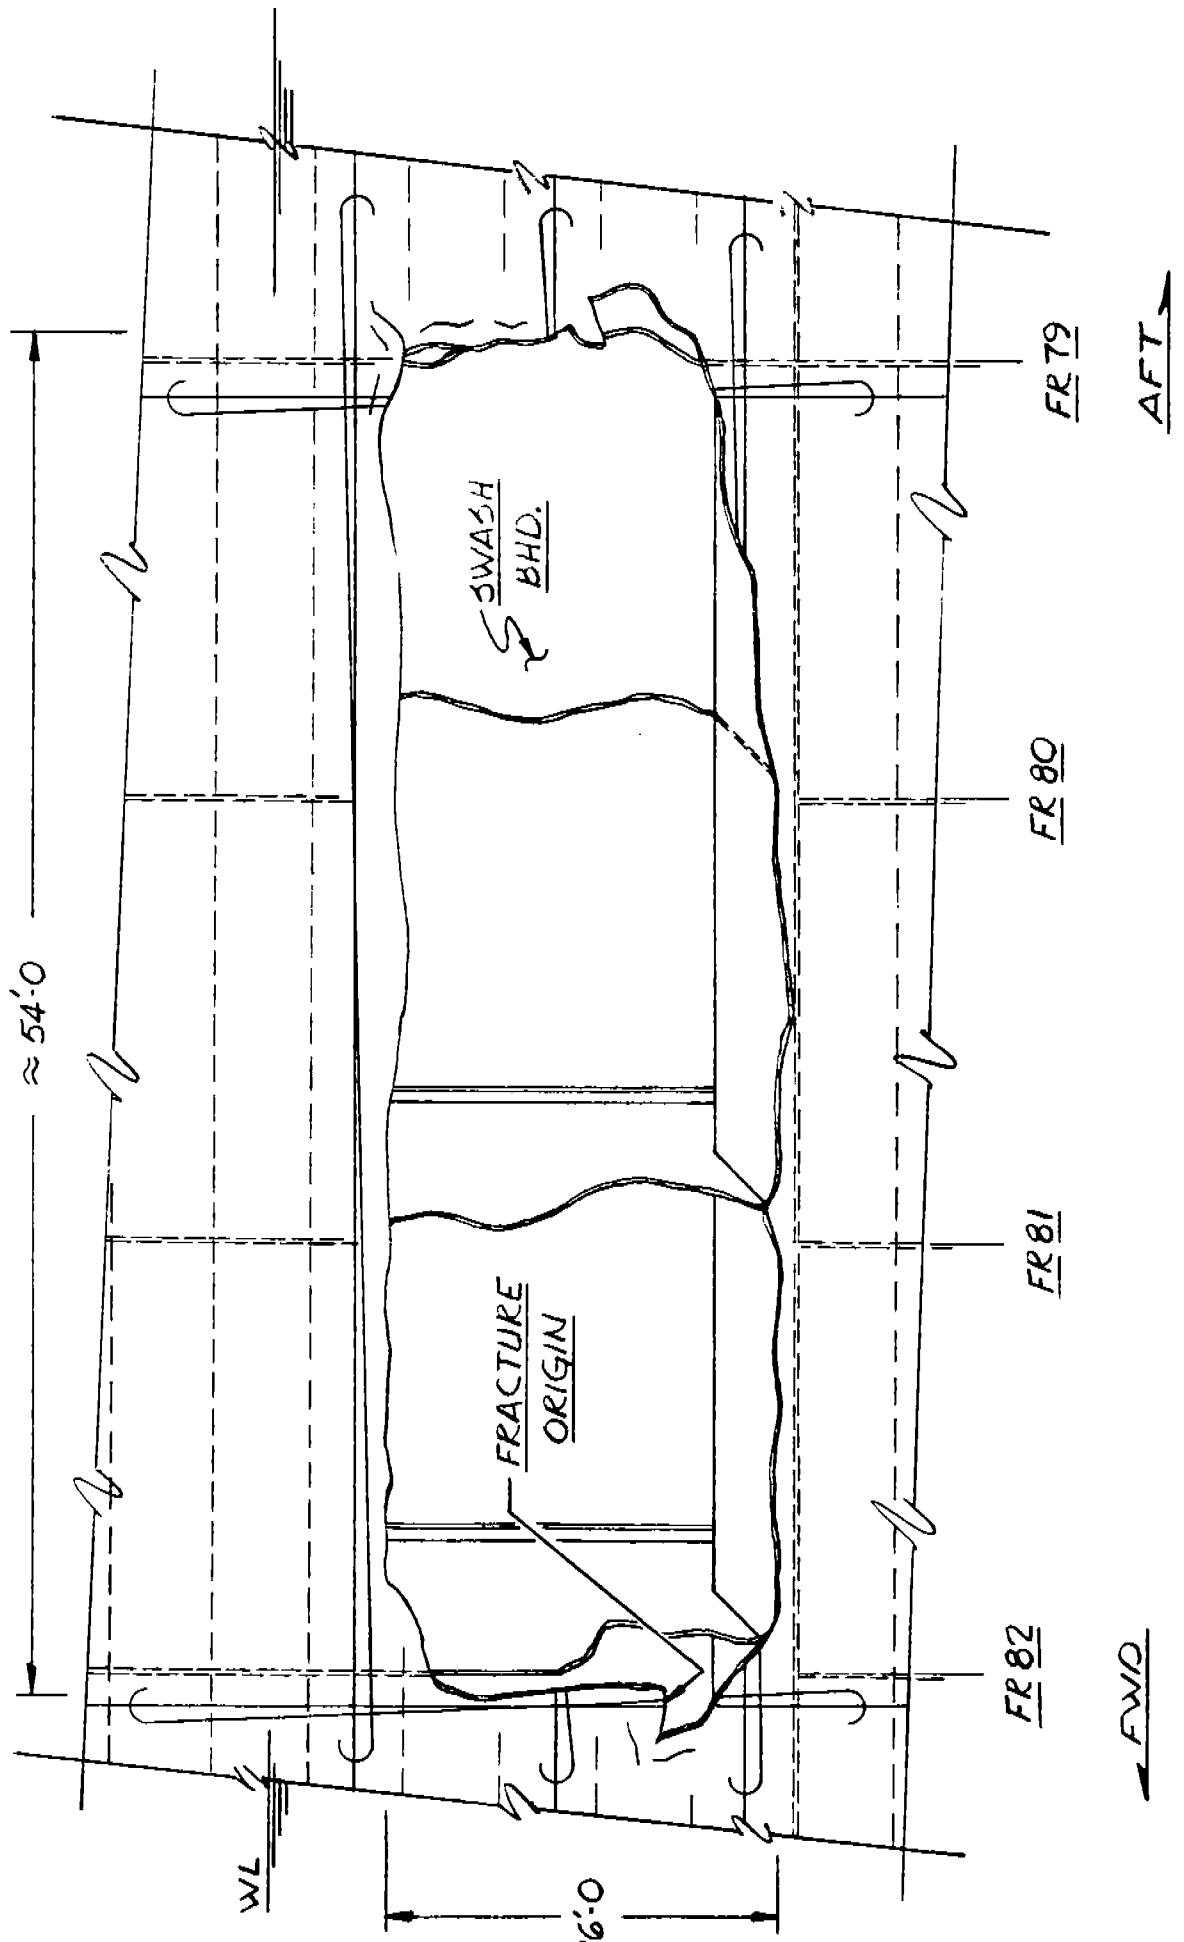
Configuration of fracture and loss of port side shell plating on the tanker
